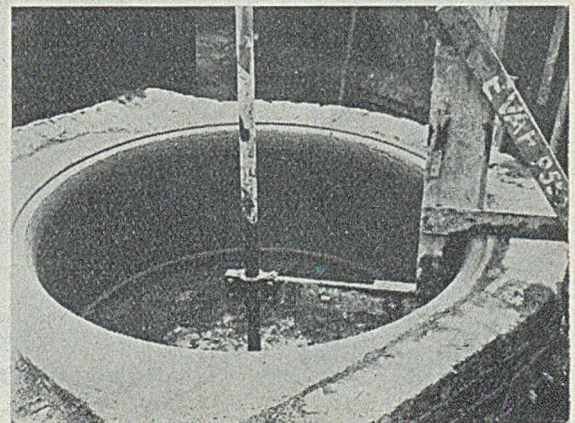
Second Joint, showing Horizontal Board attached to the Main Board, the Sweep Seat for the Cleaning Flange and Main Door.
